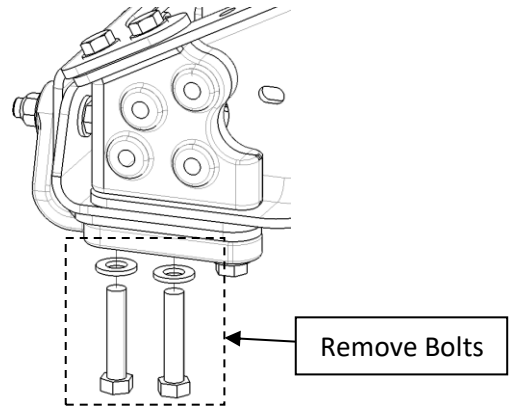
Truck Frame Bolt Removal (Driver Side Shown)
